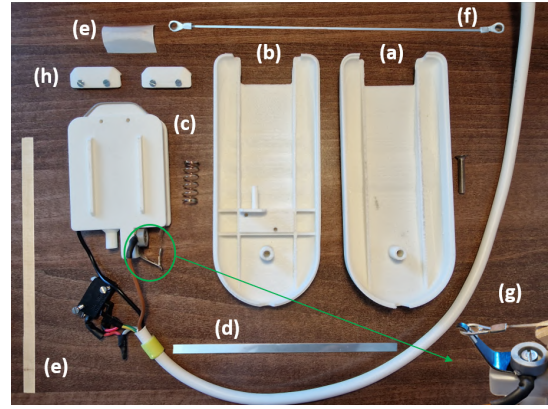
The components of the handheld piece; (a) Upper enclosure, (b) Lower enclosure, (c) Slider, (d) Heat shield, (e) PTFE tape, (f) Heating element, (g) Retention clip, and (h) PTFE hold.
